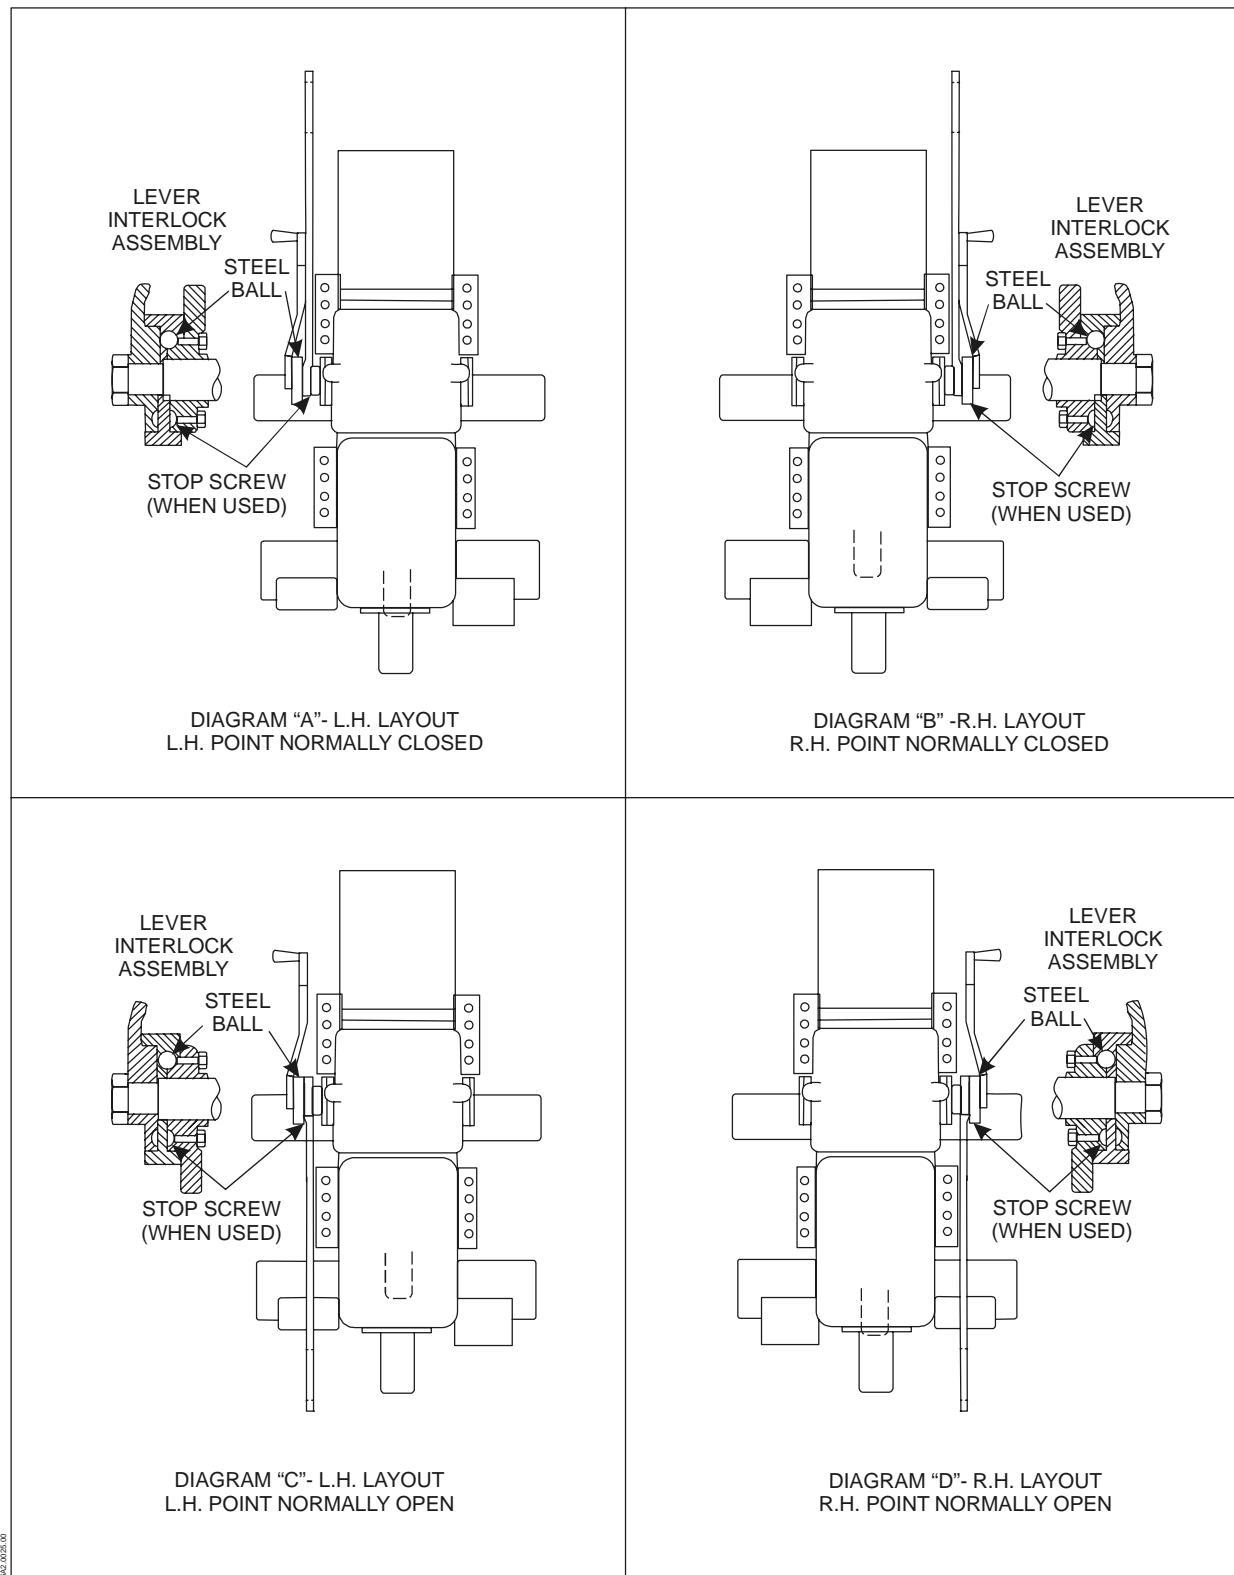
M-23 Switch Machine Standard Lever Interlock Assemblies
